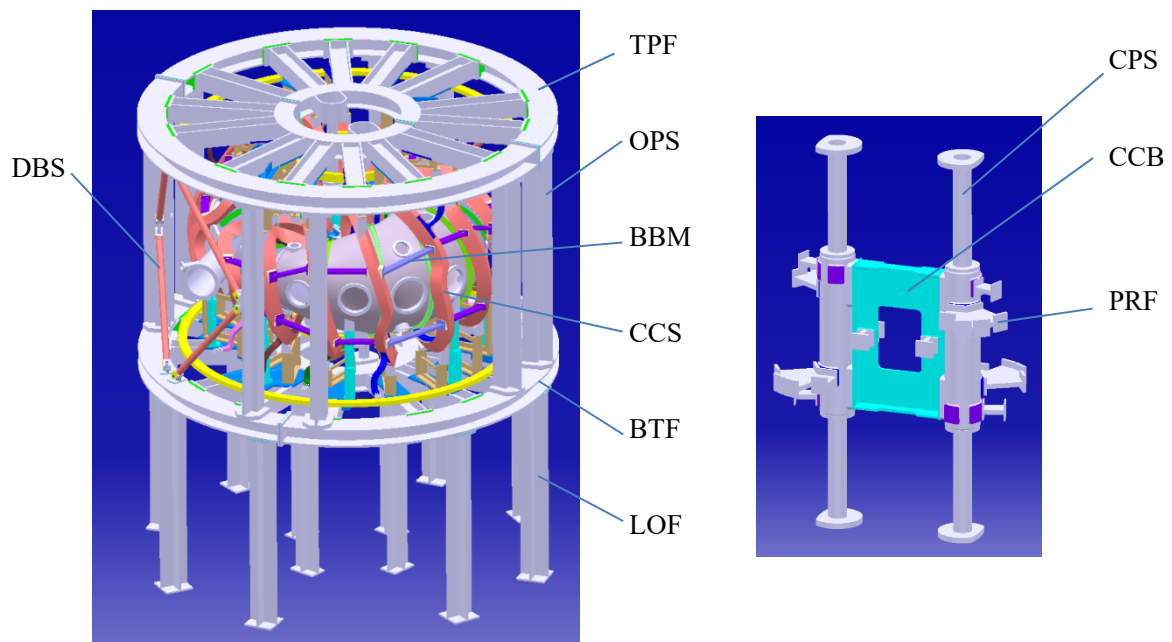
Cage type support structure. Coil cases (CCS) absorb the modular coils' expansion forces. Outer pillars (OPS) and diagonal beams (DBS) prevent the overturning forces rolling the coils over. Beams between the modular coils (BBM) are used to cancel out the toroidal force imbalance. Two central pillars (CPS), one central connection board (CCB) and some pedestals receiving force (PRF) absorb the large centripetal forces. The vertical force and gravity are received by a top frame (TPF), a bottom frame (BTF) and legs of frame (LOF).
